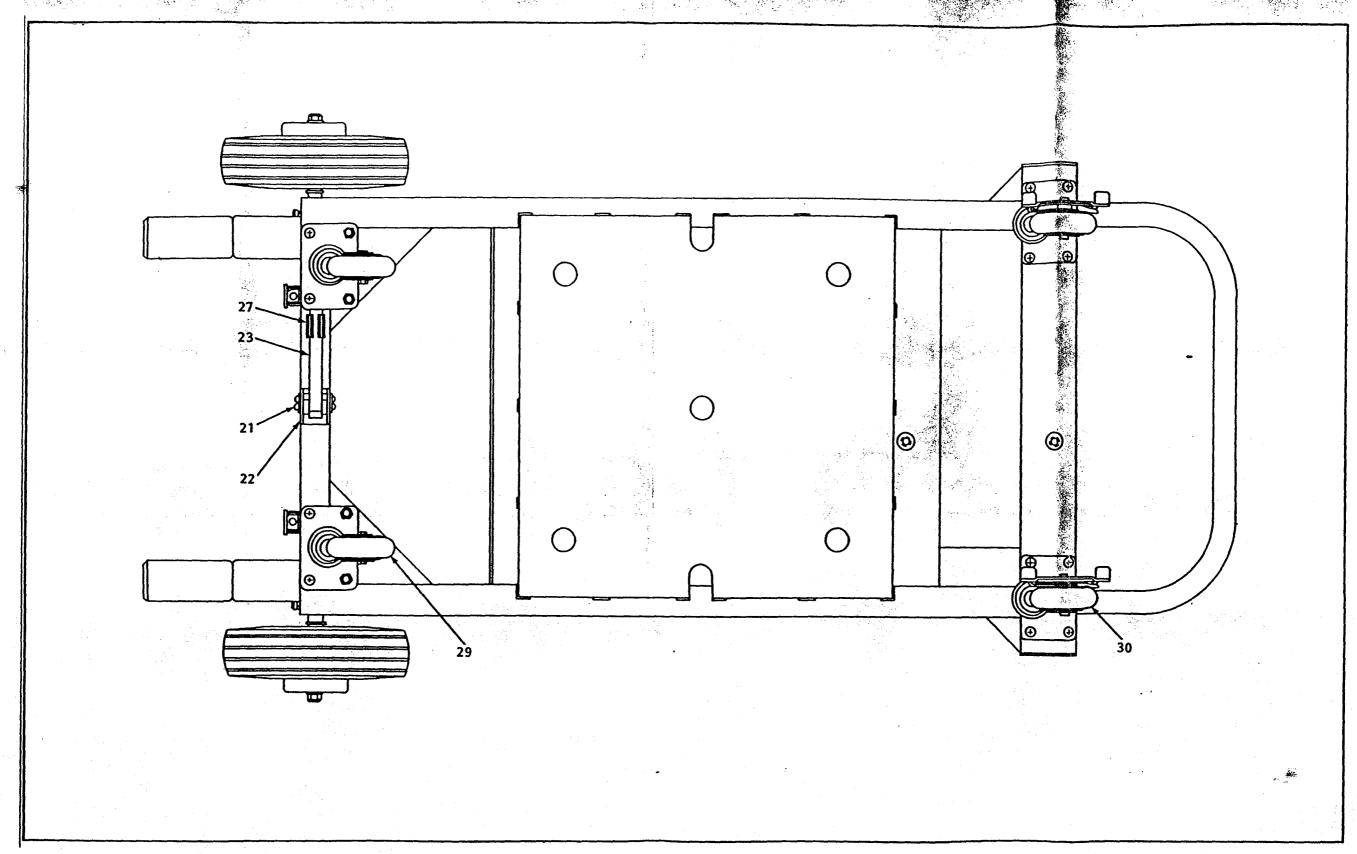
Base Assembly, Top View, Location of Components (Sheet 2 of 5)
